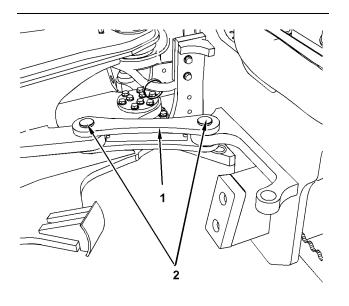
g01377268 Steering frame lock in the LOCKED position
